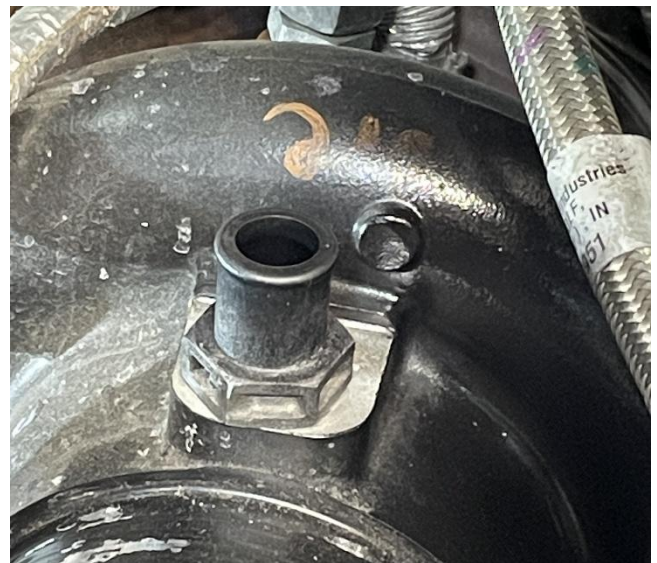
CCV hose and clamp removed. CCV fitting still installed in turbo.
